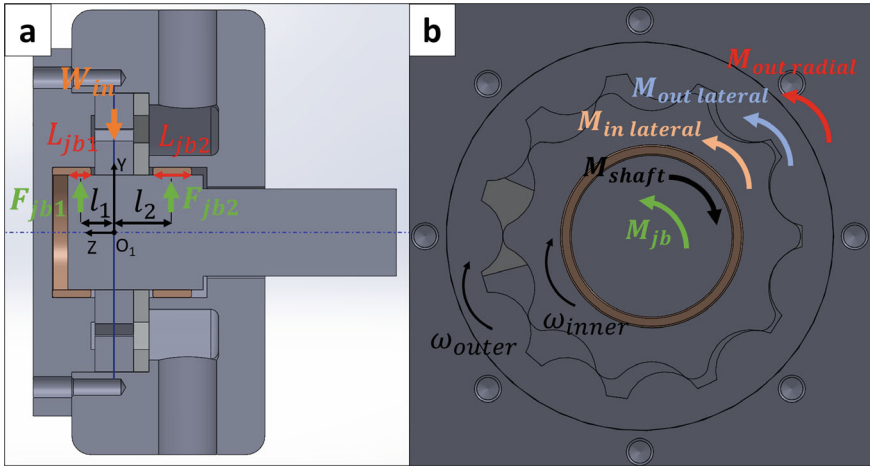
(a) Journal bearings reaction. (b) All torques applied to the gears
